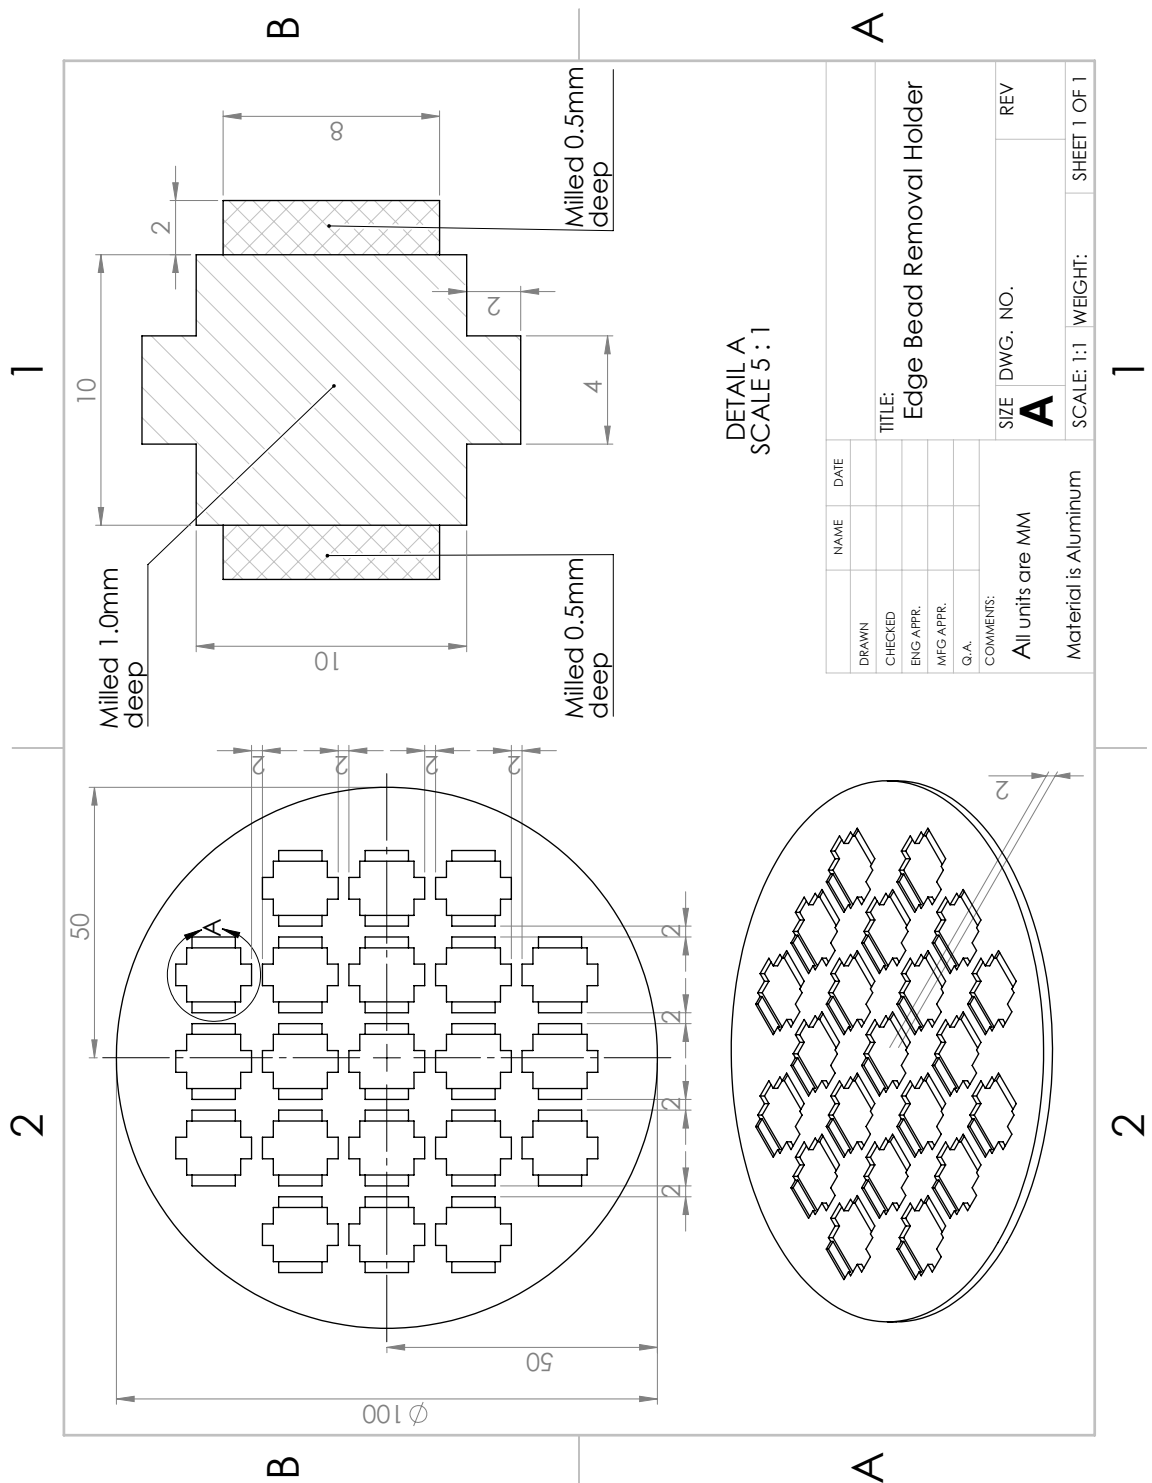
Mechanical drawing for the sample holder used in the double exposure process to remove the photoresist edge bead.
